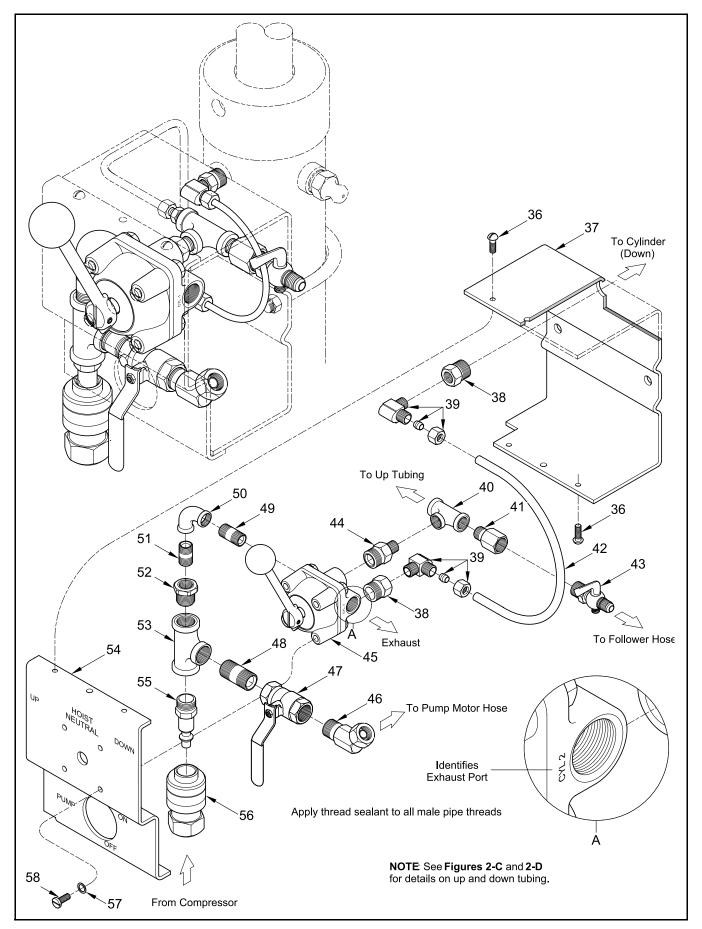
B Pump Hoist Model 7818-F5 - Exploded View (Control Box)
